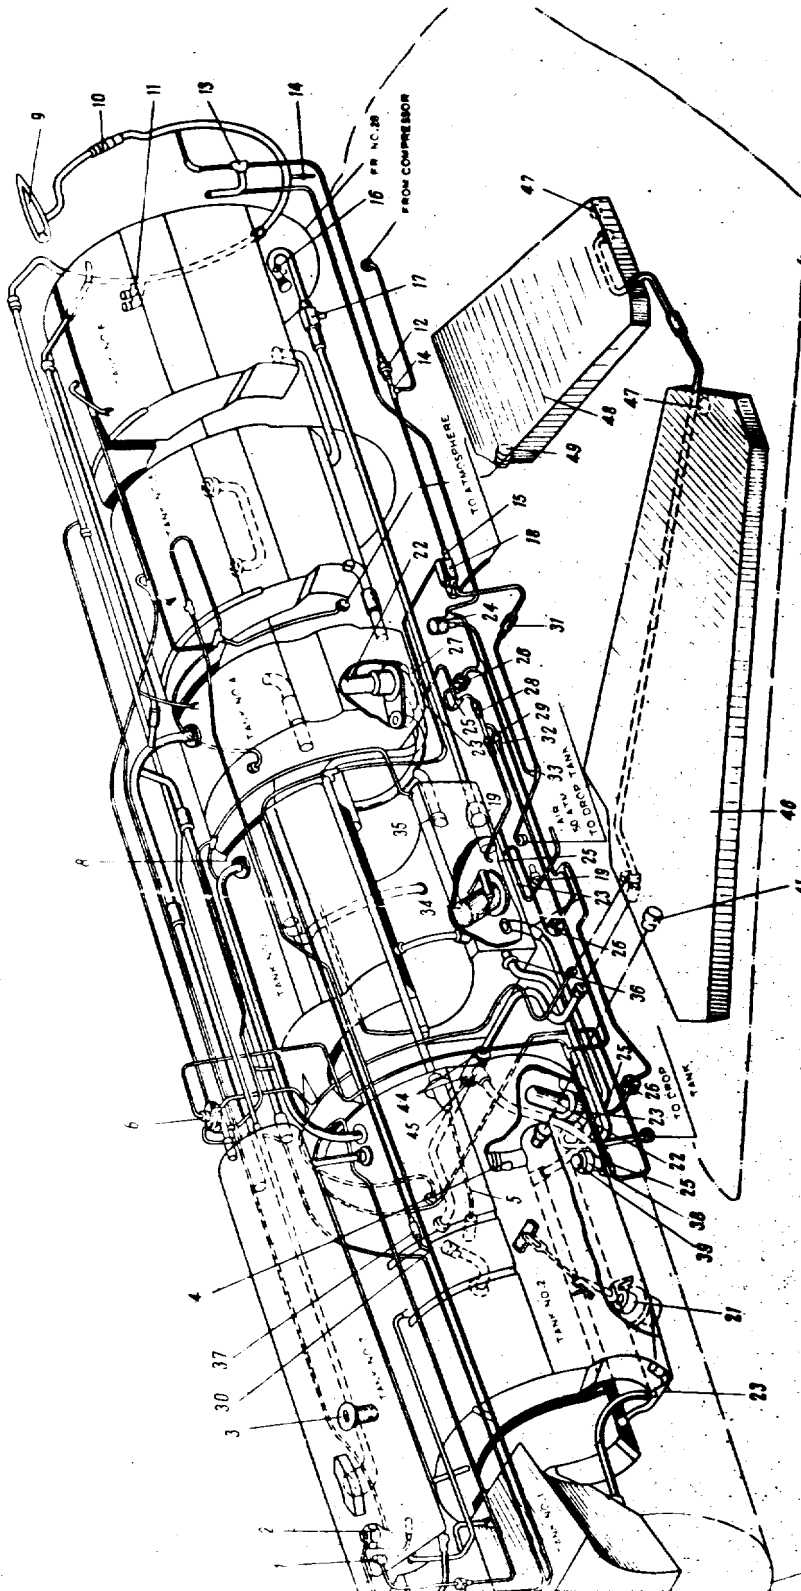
FUEL SYSTEM COMPONENT PARTS
